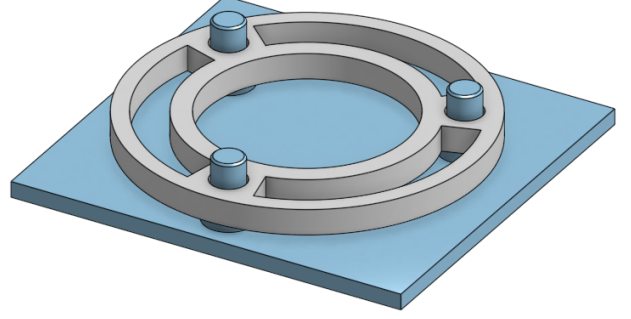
Simulated assets for the ring insertion task. The ring gear (grey) is inserted onto the gearbox plate (blue).
